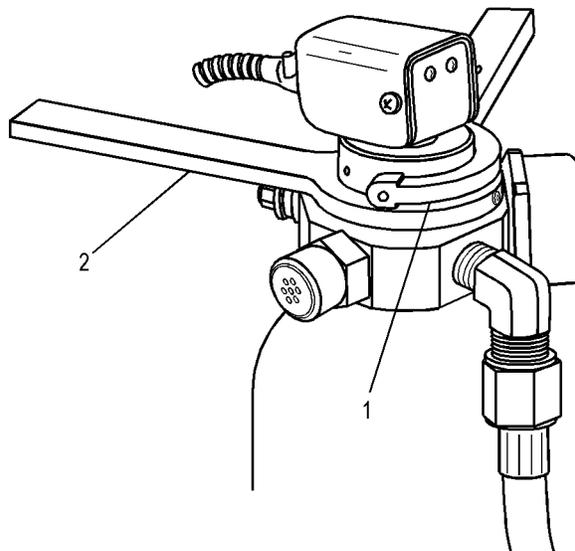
A-8. Post Assembly Adjustment of Pressure Reducer Assembly
